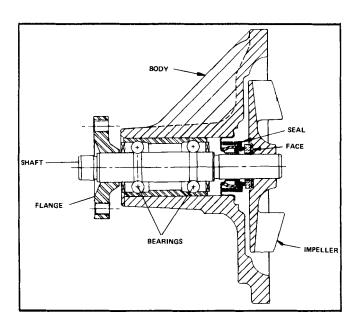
A-8 Cross Section of Water Pump (V-8 except 307)
